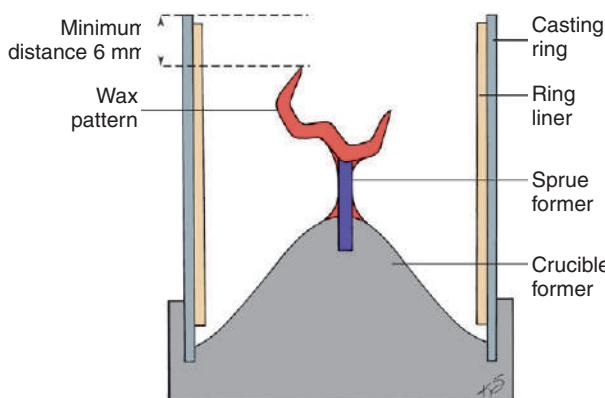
Wax pattern attached to the crucible former with a sprue ready for investing. A ring liner is in place.
